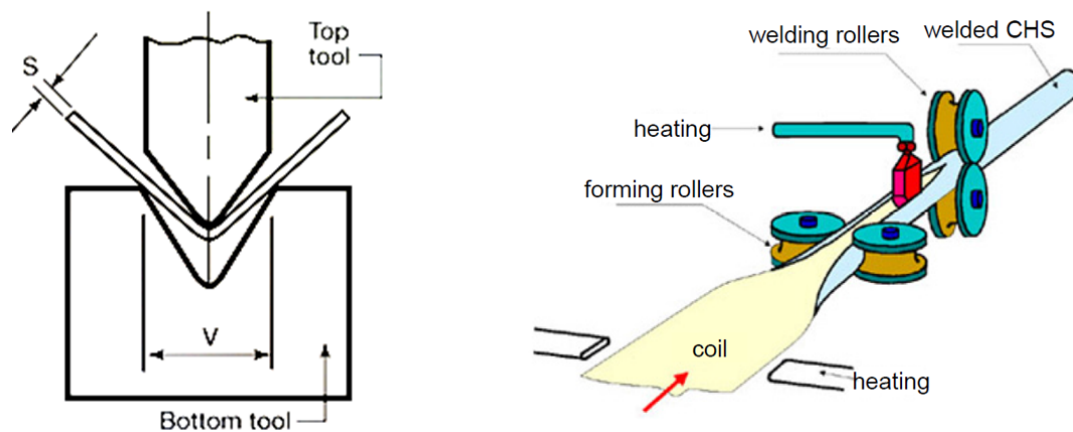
Manufacturing processes – a) press-braking – b) roll-forming
